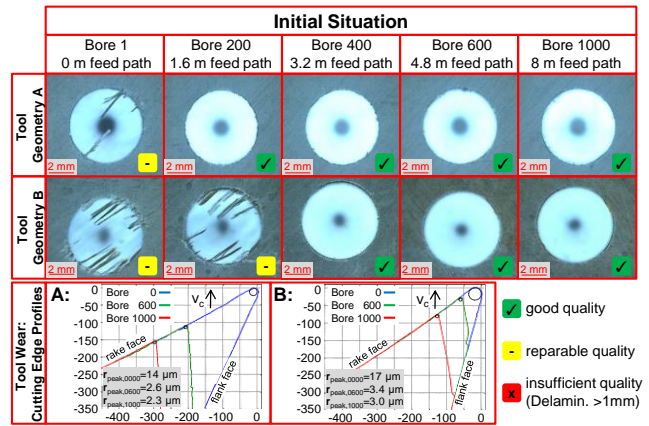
Self-sharpening tools with cutting in CFRP [53]
